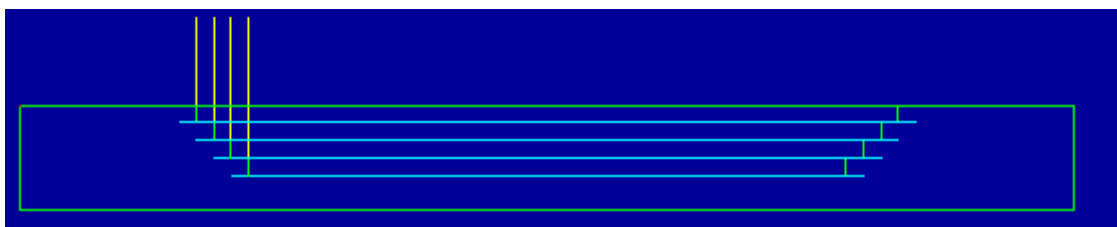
13 Master CAM model for tool path that is the way tool incrementing with Δh
